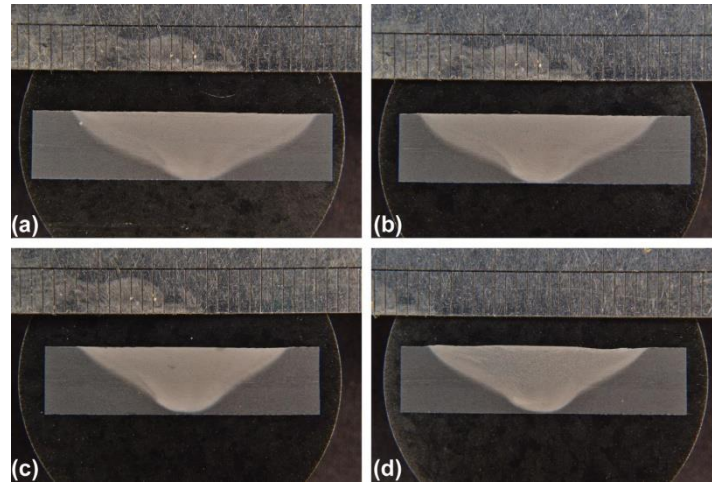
Shows the HAZ in welds W1, W2, W3, W4 [6]
